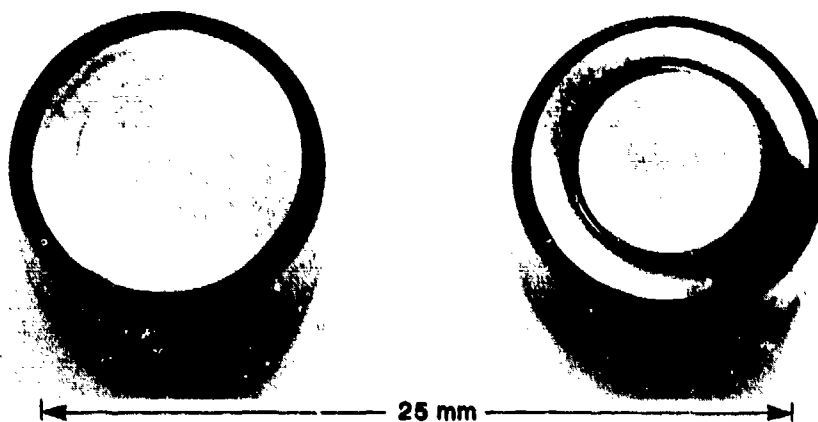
Excessive Roller End Wear (Right) Causing Roller Skewing and Eventual Destruction of Bearing
